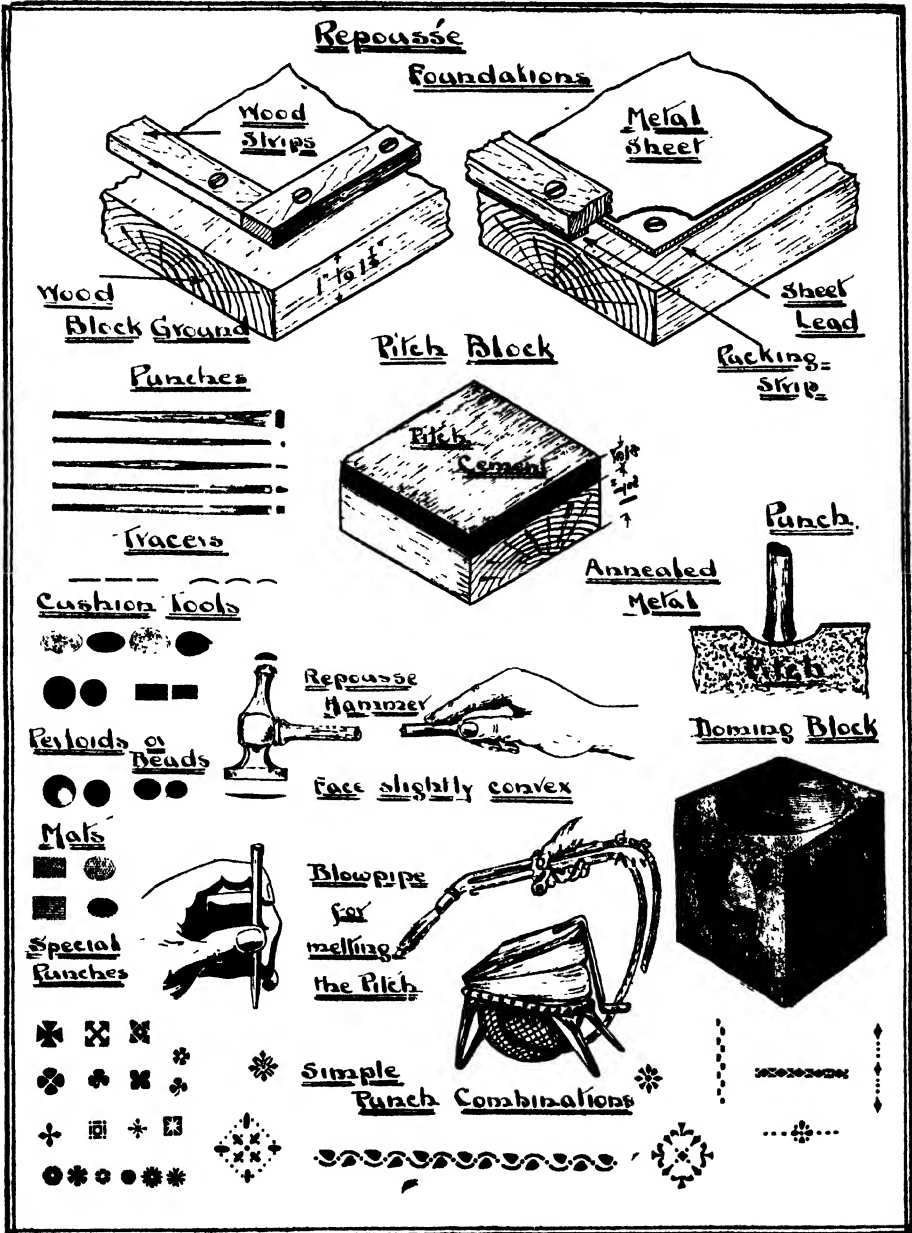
REPOUSSÉ. TOOLS AND FOUNDATIONS.
